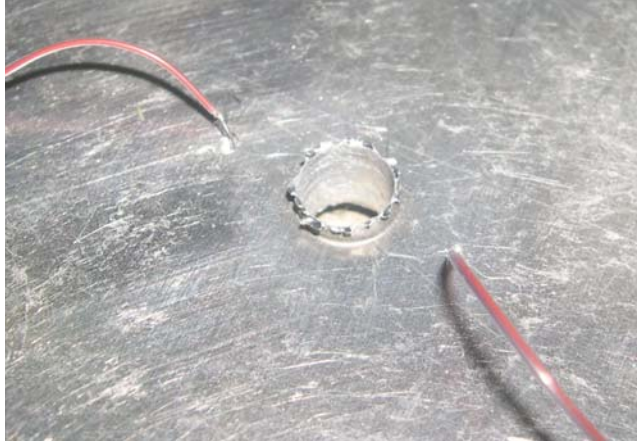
Two thermocouples embedded in small holes on workpiece 7.5 and 5.1 mm from the center of drilling for temperature measurement (5.3 mm diameter drilled hole between thermocouples for scale).
